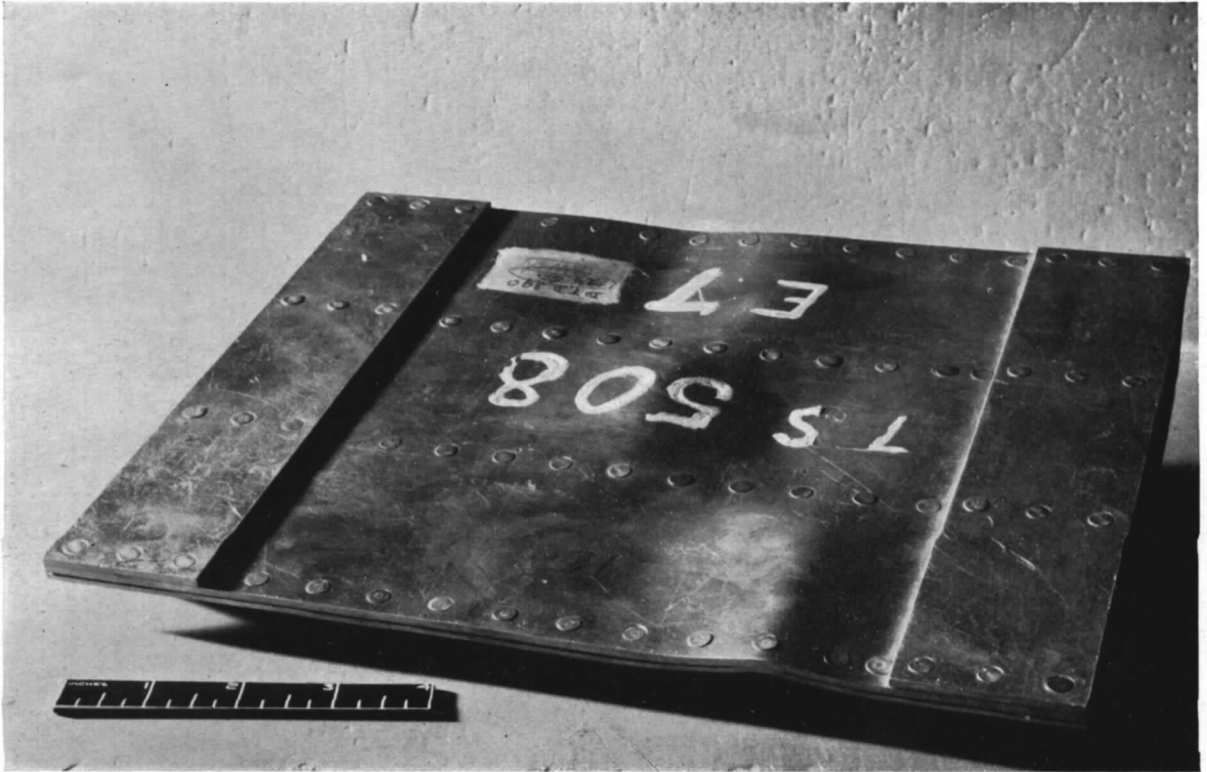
Specimen Number E7 showing typical quilted failure (staggered rivets).
